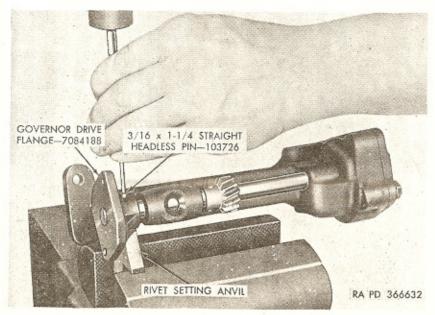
Using anvil—B7950326 to remove governor drive flange retaining pin.
